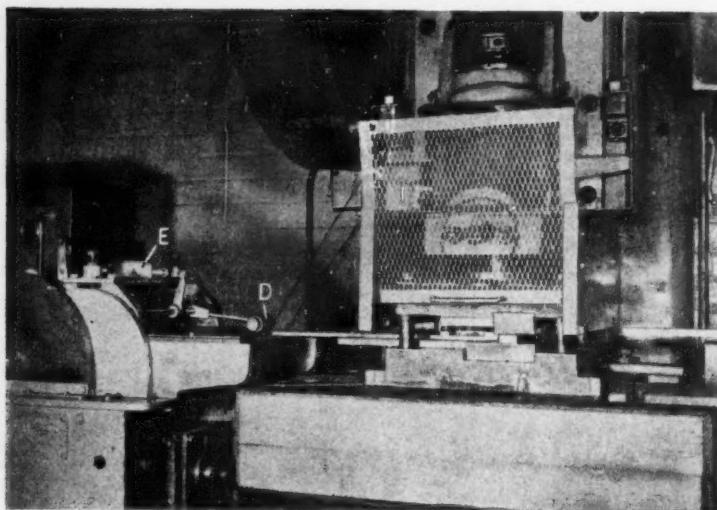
Close-up view of the tool and the outlet side of the feed unit adjacent to H.M.E. 40-ton power press
